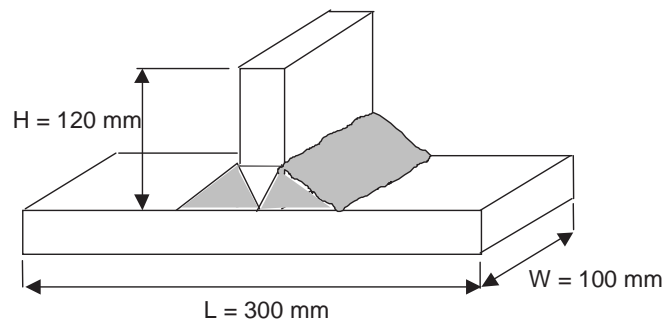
SAW full penetration fillet welded ‘T’ joint - fatigue specimen dimensions
